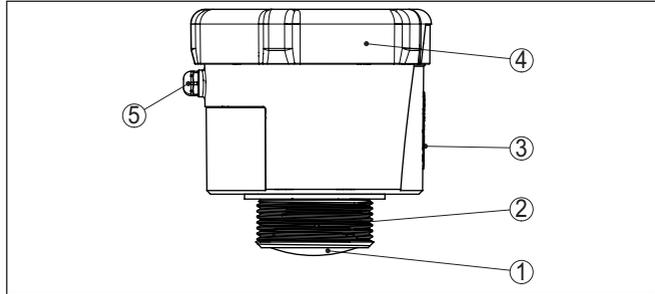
Components of the VEGAPULS Air 41 sensor - Example version with thread G1½
